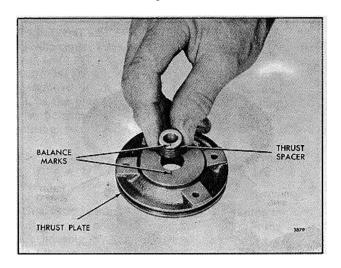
Installing Trust Spacer in Center Housing Thrust Plate
